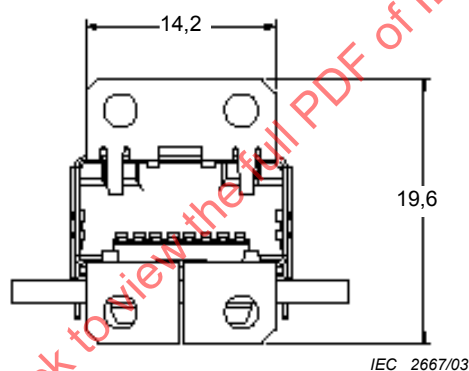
Top view fixed board connector (XB) right angle (version 2)
